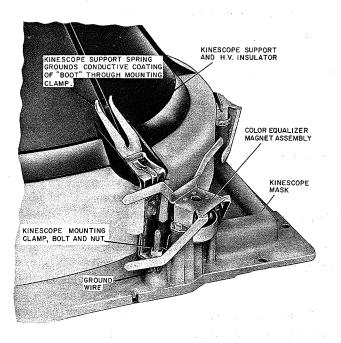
Close-up View-Kinescope Mounting Clamp.
